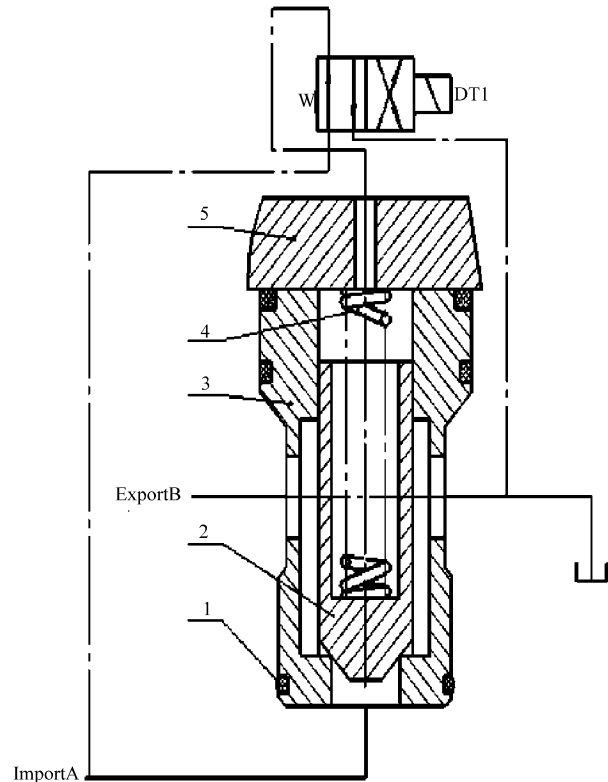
Structure principle diagram of electromagnetic directional valve, (1) Seal ring, (2) Valve Spool, (3) Valve sleeve, (4) Spring, (5) Cover plate
